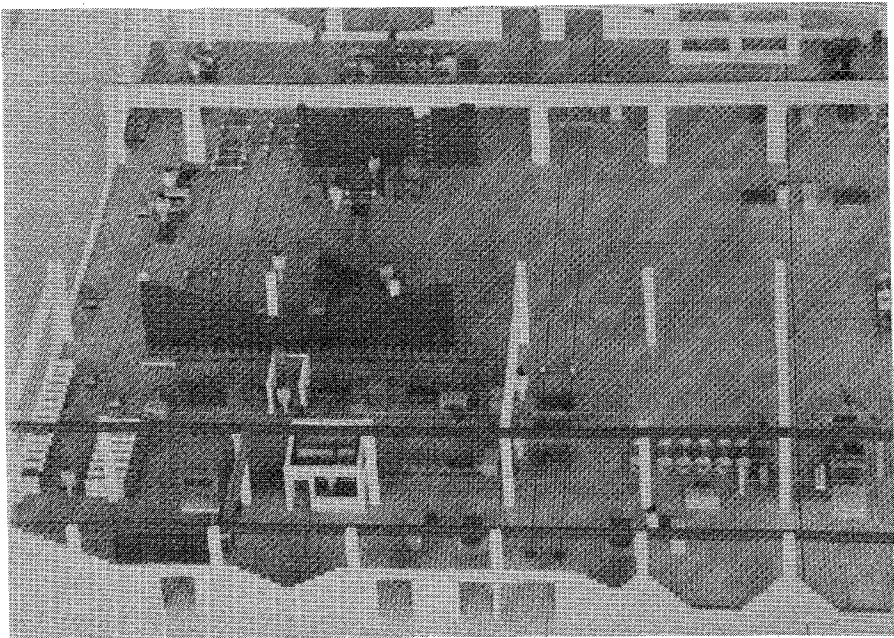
Scale model (1 : 50) of lay-out of new roller-bearing department.
